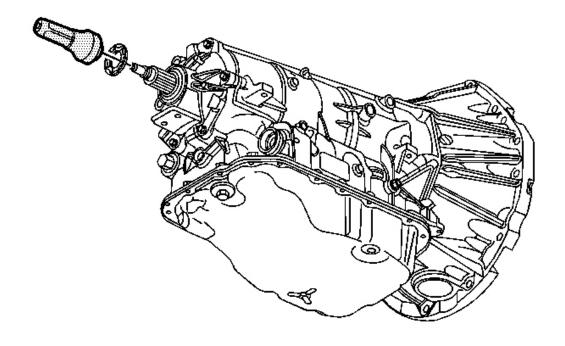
View Of J 37212 Courtesy of GENERAL MOTORS CORP.
